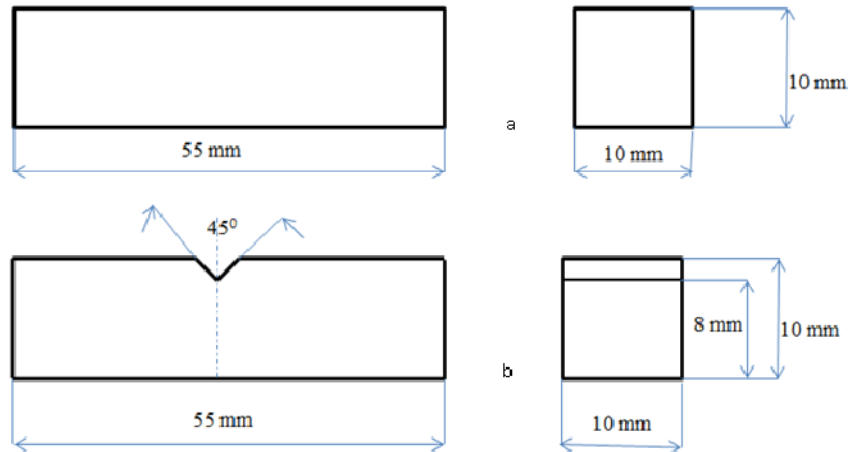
Size of the specimen, a. Corrosion rate specimen ASTM G31-72, b. Impact test specimen ASTM E23
